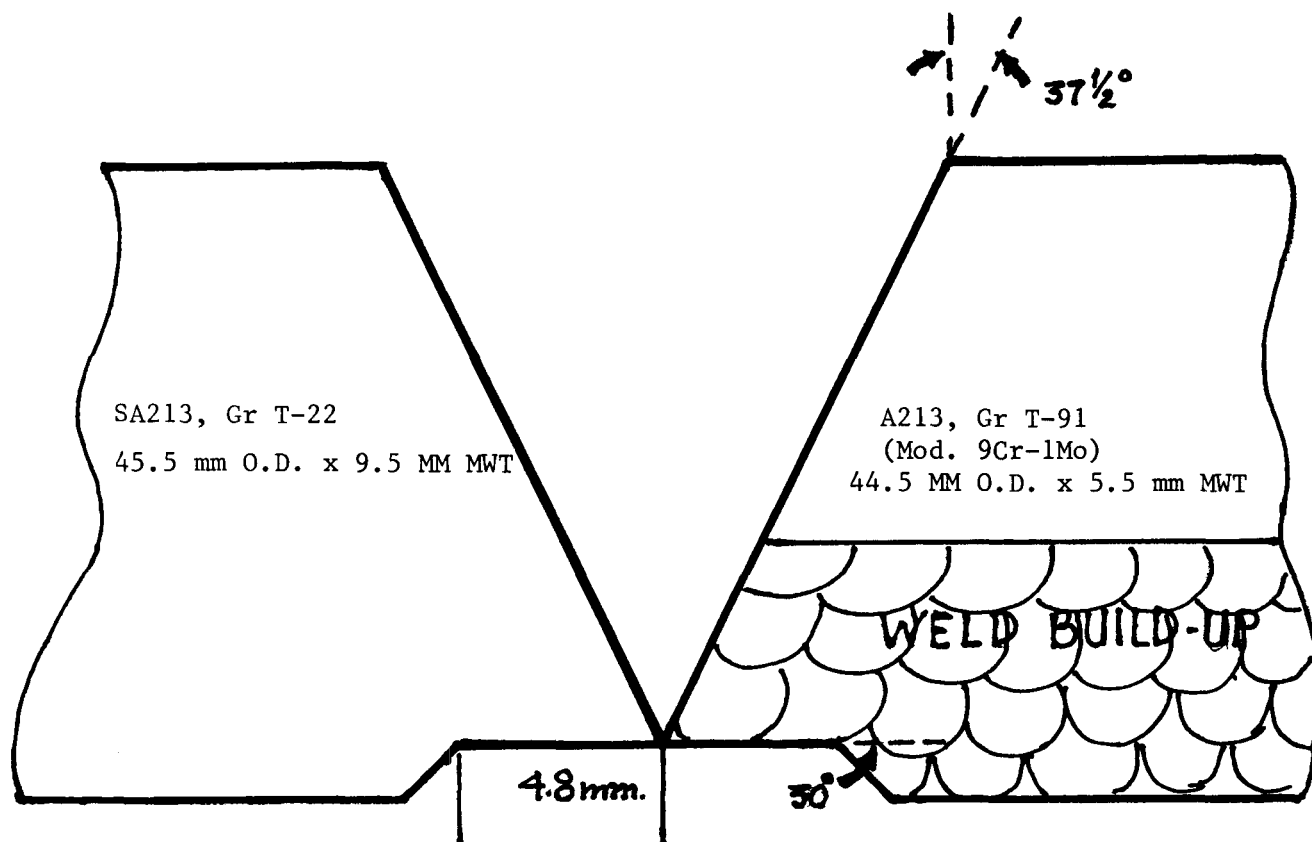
Weld build-up detail, T-22/modified 9Cr-1Mo, safe-end joint, Nanticoke TGS.
